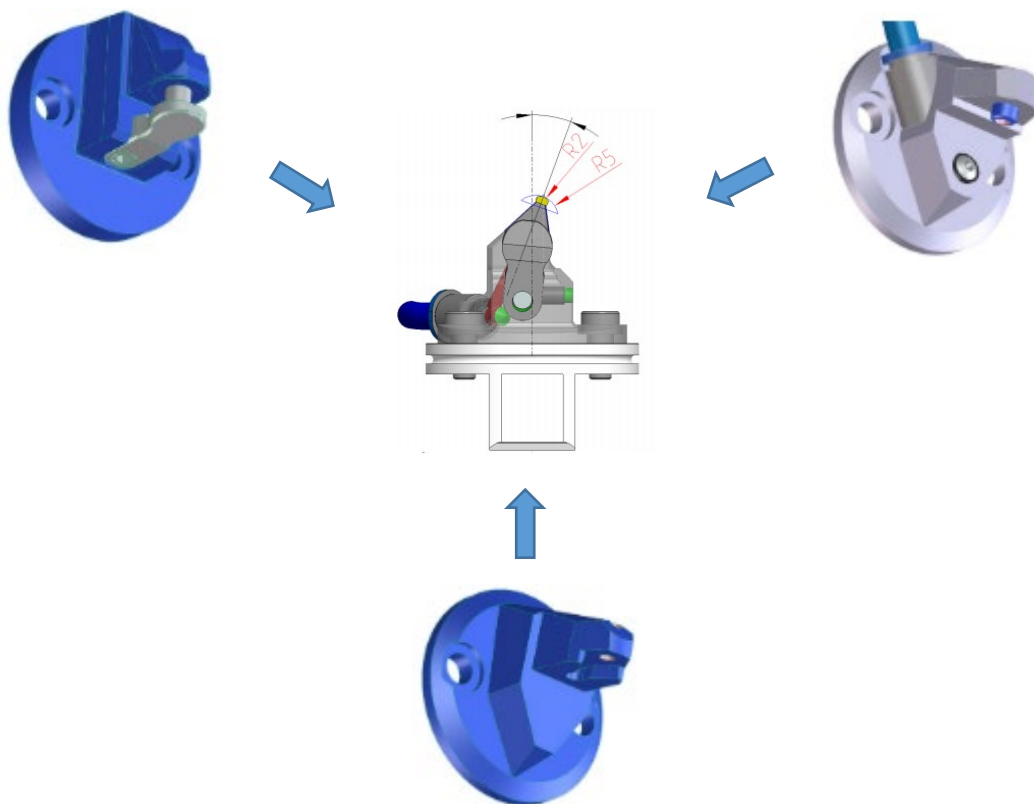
New tool-holder utilizes benefits from other SL tool-holder designs
